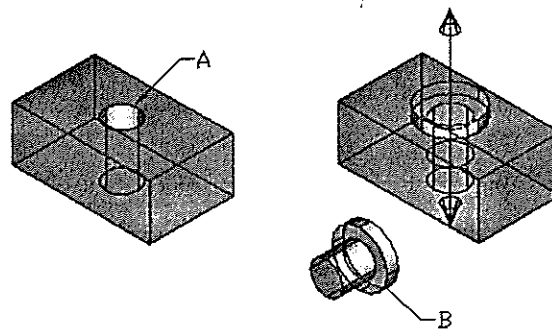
Insert constraint — circular edge B is inserted into circular edge A
